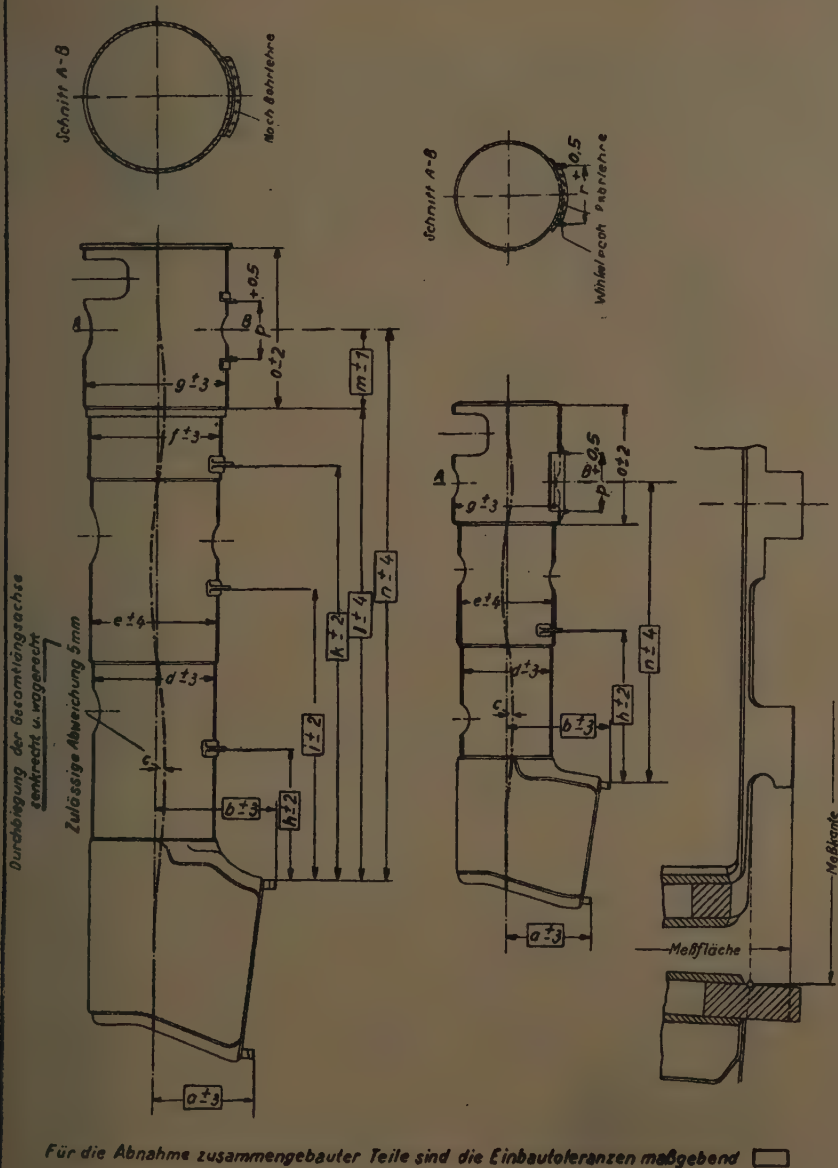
Tolerance instruction sheet for standard locomotives of the Deutsche Reichsbahn. — Boiler.
